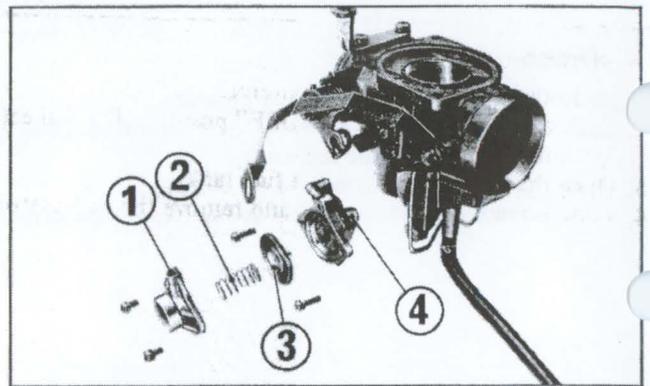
(1) Air cut valve cover (2) Spring (3) Diaphragm (4) Valve body
